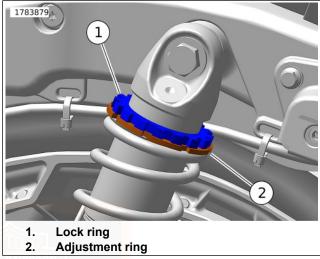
Threaded Adjuster (Right Side Shock Absorber)
